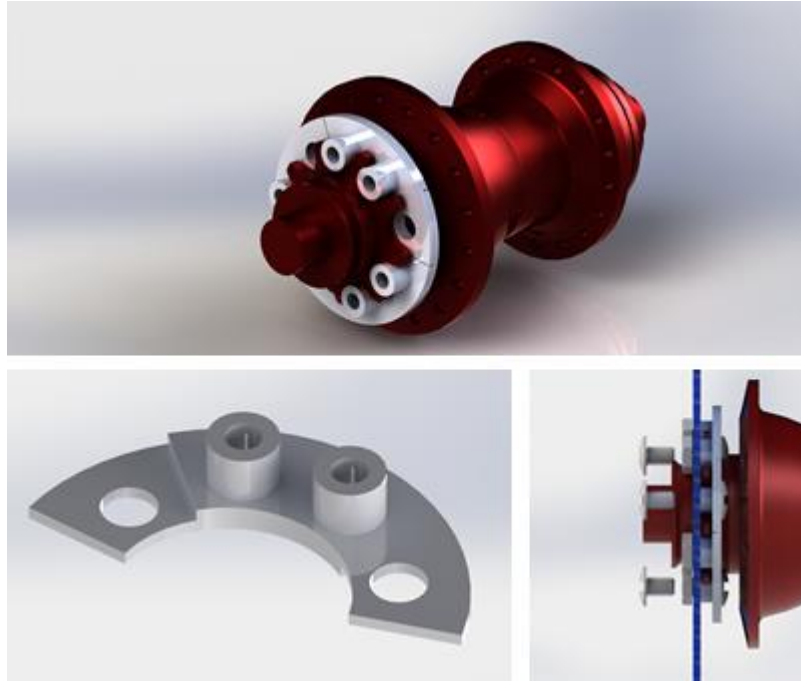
Sprocket Fastener. The bottom left shows the fastener by itself, while the picture in the bottom right shows a profile view of the assembly
